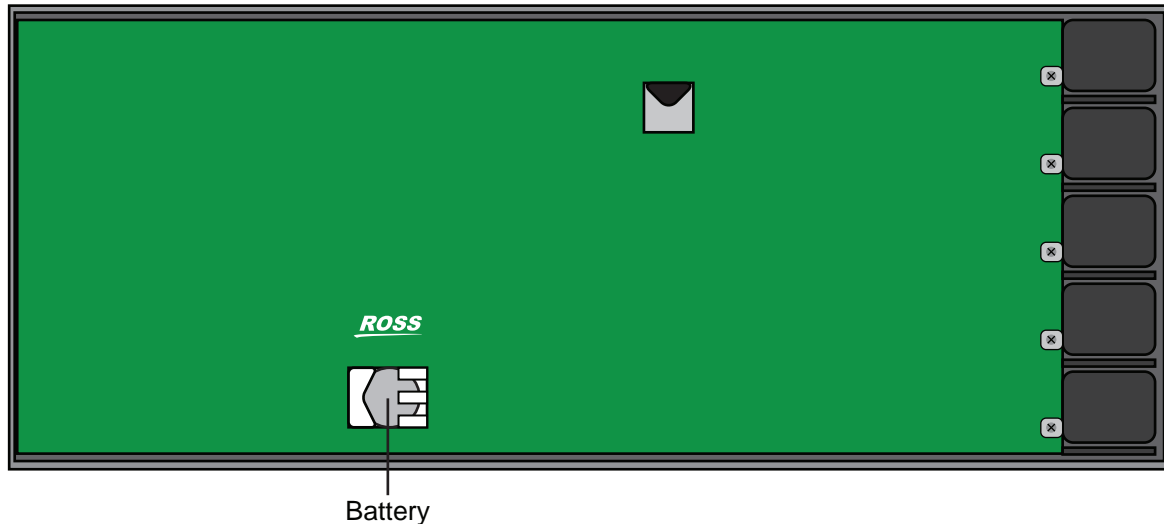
ULTRIX-FR5 — Battery Location inside the Chassis
